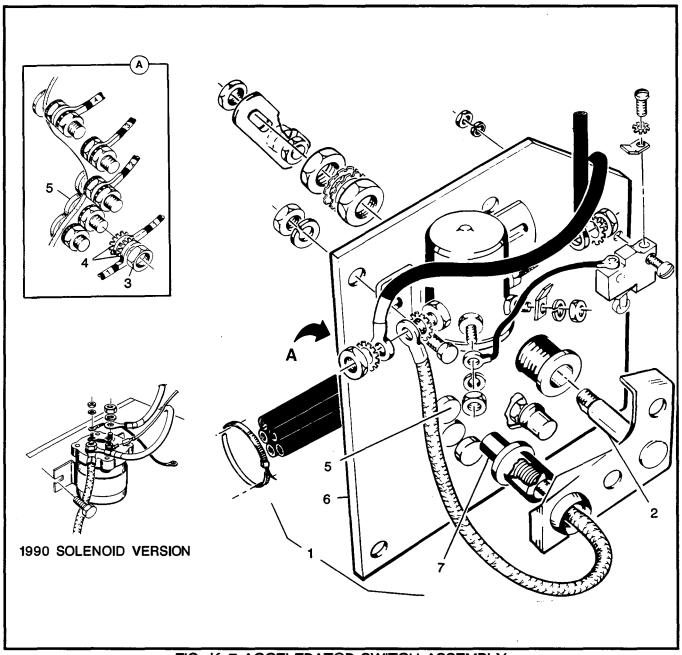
ACCELERATOR SWITCH ASSEMBLY
